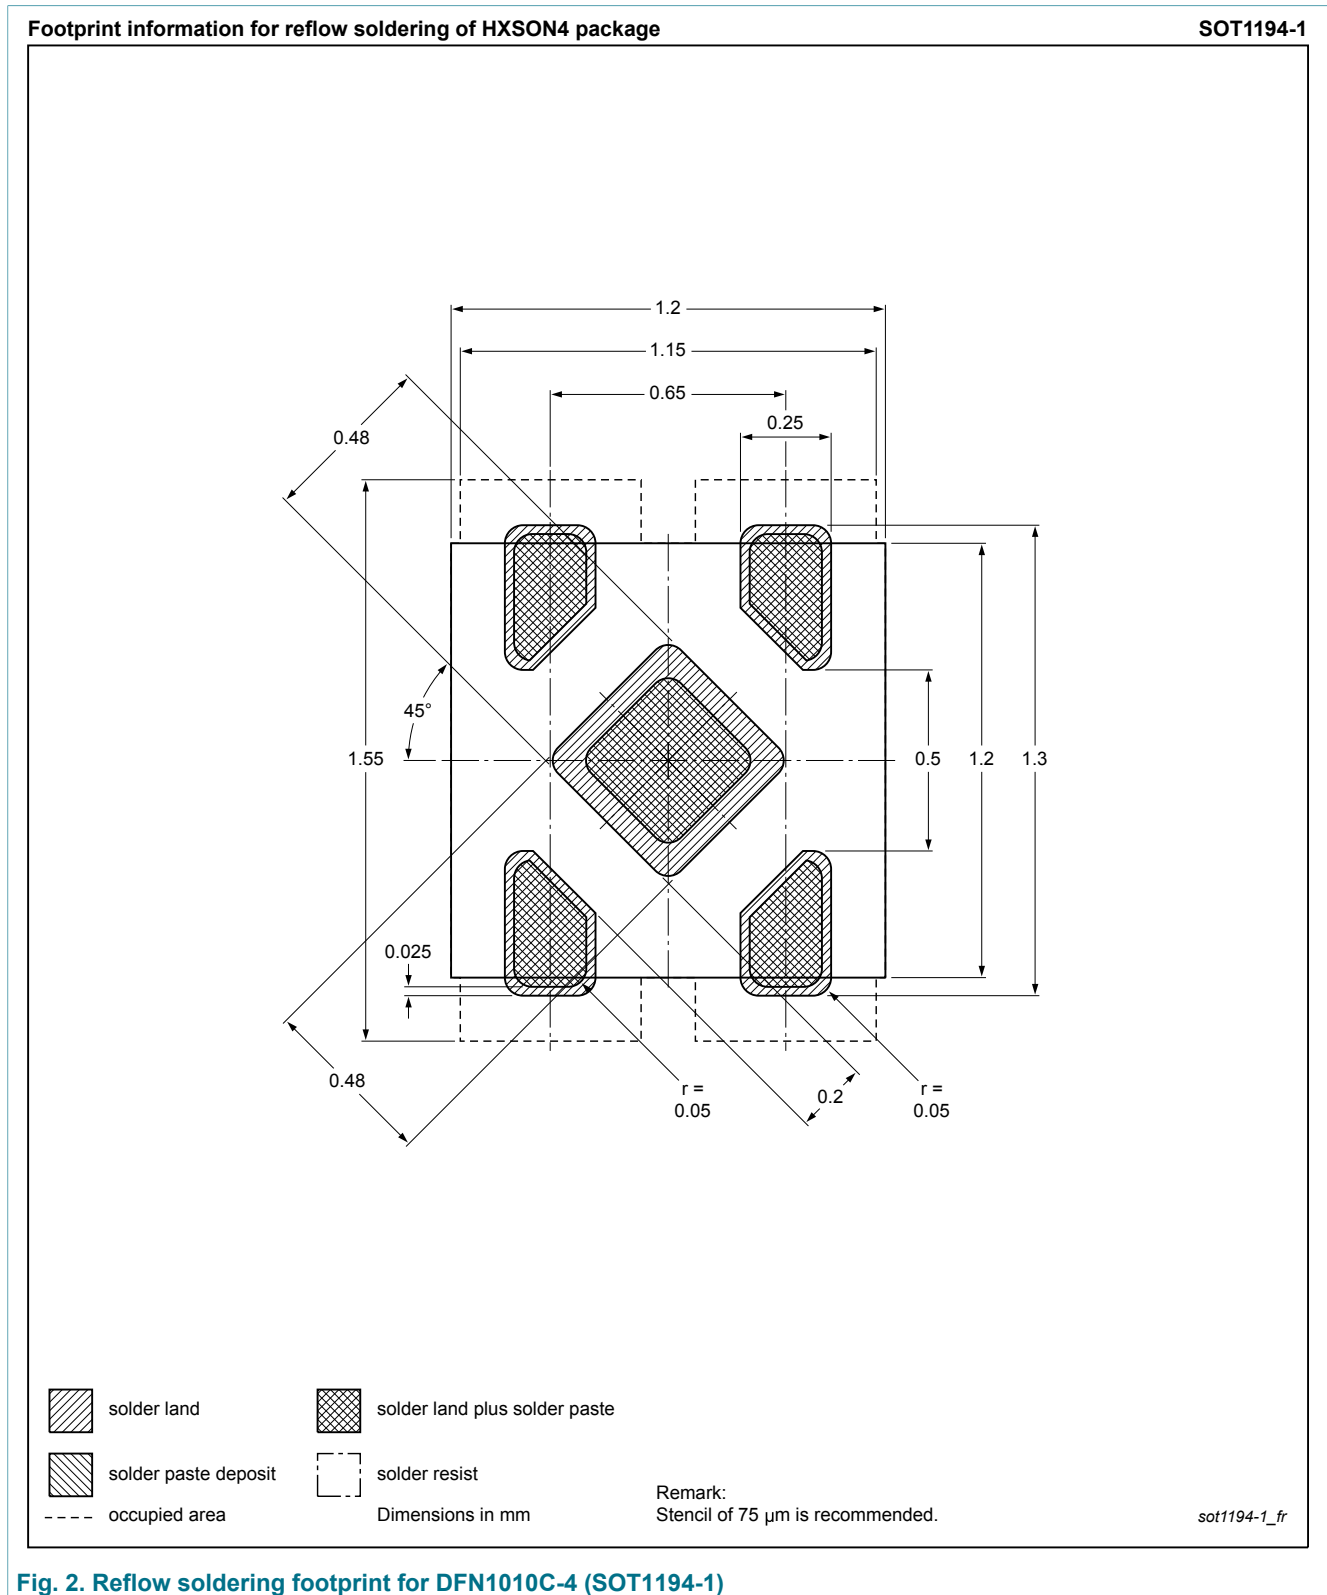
Reflow soldering footprint for DFN1010C-4 (SOT1194-1)
